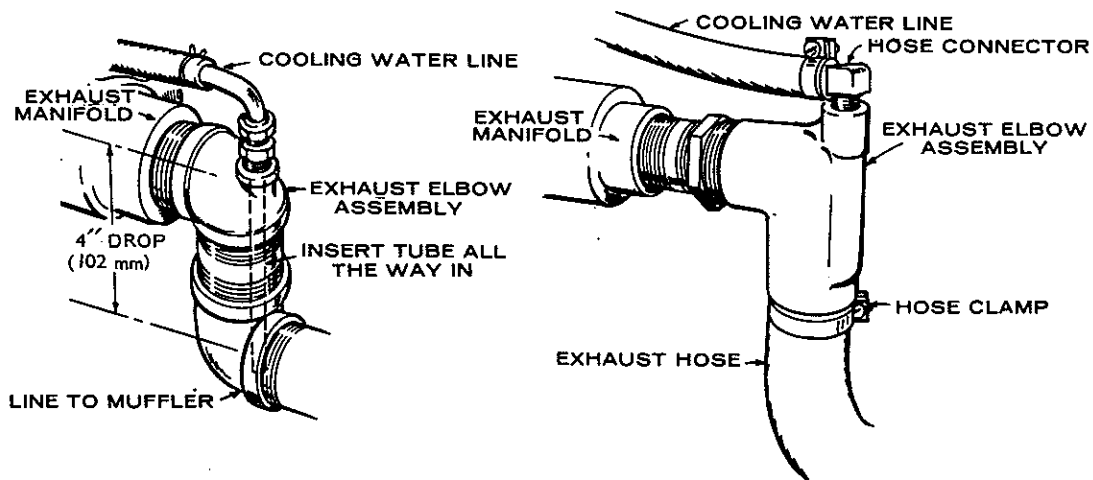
TYPICAL WATER INJECTION EXHAUST ELBOWS
